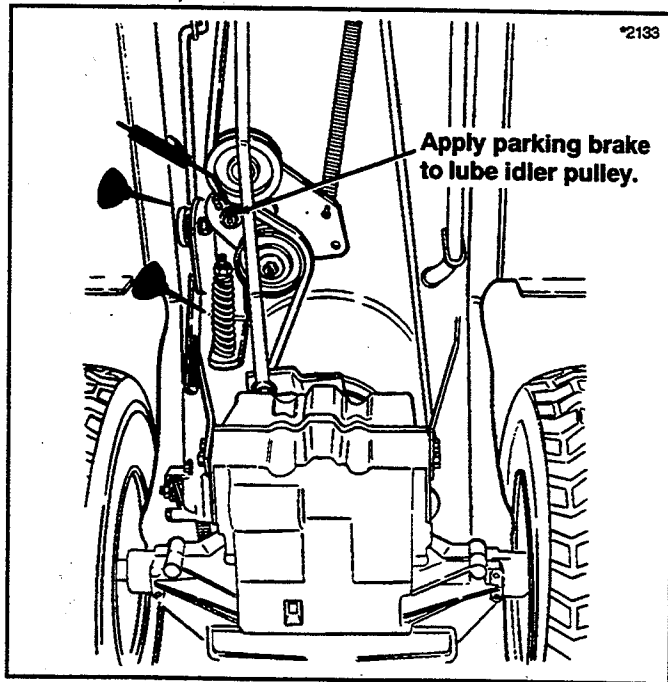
Tractor Lubrication Points - Rear Half (Gear)
